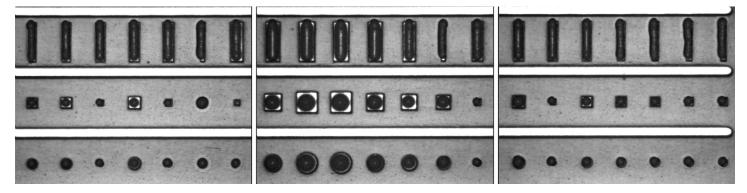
Solder dispensing samples for SiP and MEMS packages.
